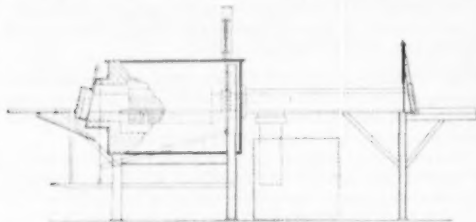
LONGITUDINAL SKETCH OF TYPICAL BOX-TYPE BRAZING FURNACE
